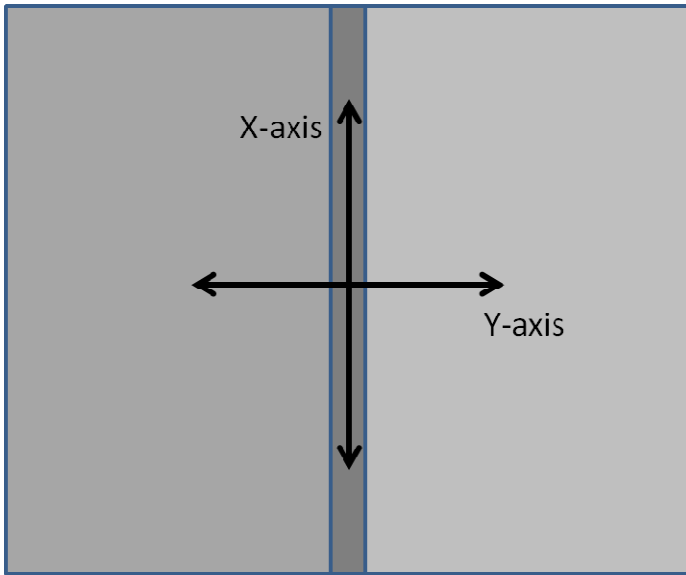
A butt weld (center) between two plates (sides)
